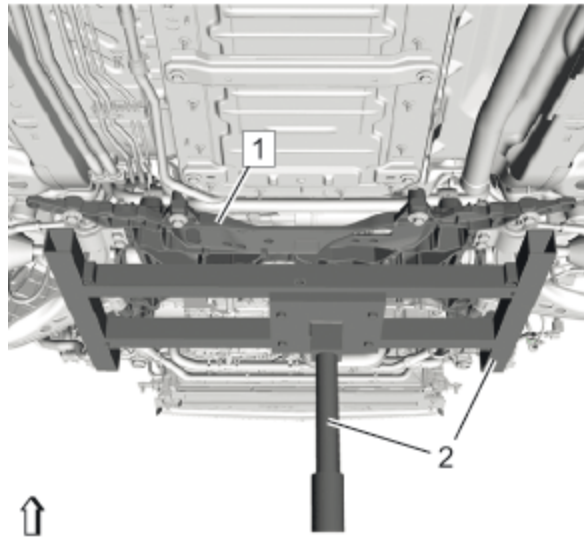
Drivetrain And Front Suspension Cradle Supported With Suitable Hydraulic Jack
